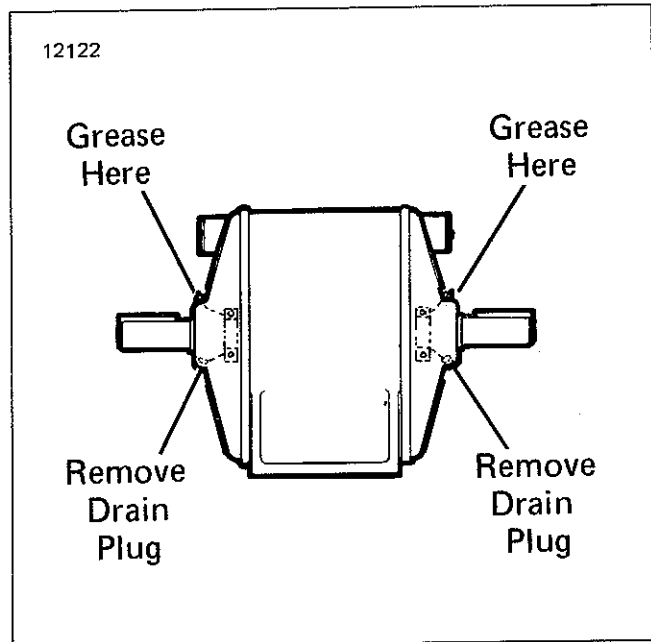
Eddy-Current Brake Bearing Lubrication.
